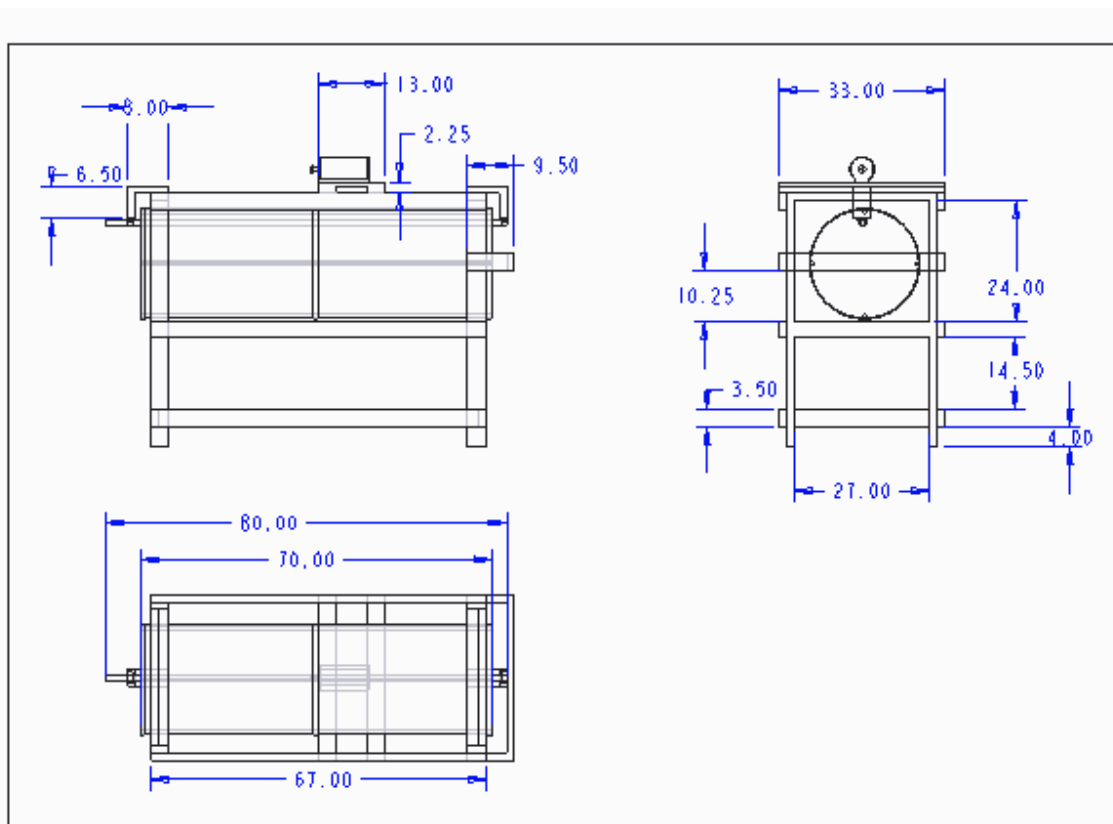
Drawing of Sand-Seaweed Separator, units are in inches.
